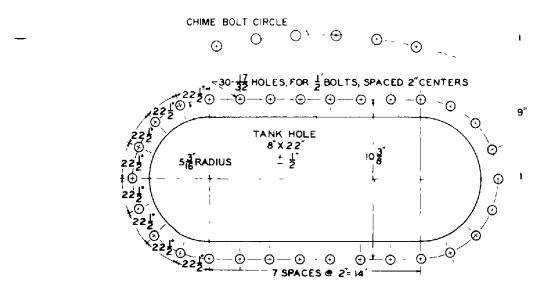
Bolting Pattern for 8-in. × 22-in. Oblong Thief Hatches, Pressure-relief, and Vacuum-relief Valves
